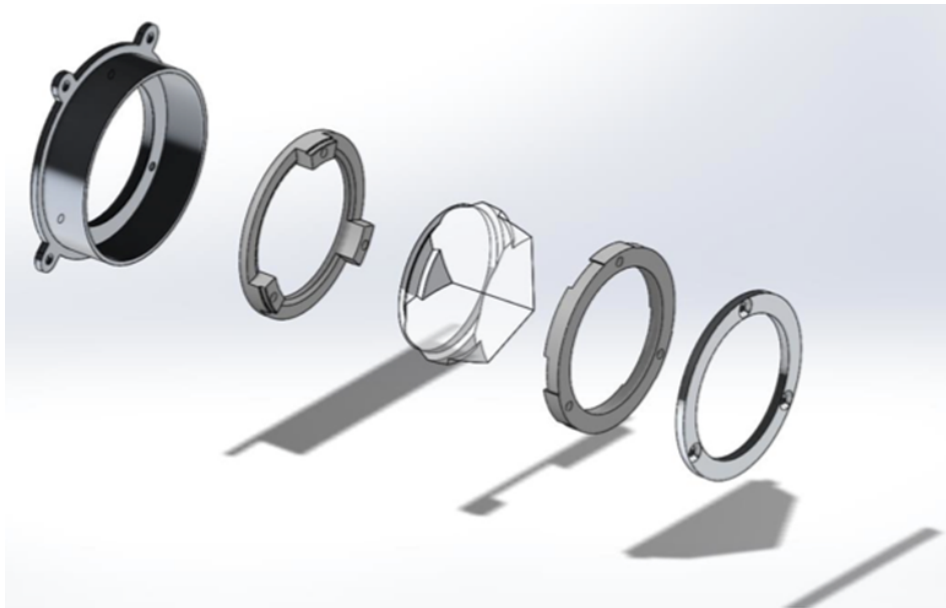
Housing, exploded view with, starting from the left: housing, upper KEL-F ring, CCR, lower KEL-F ring and Aluminum ring.
